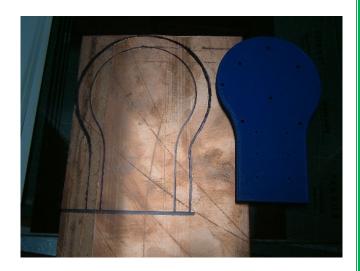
Backhead plate marked out onto 3mm copper sheet ready to be cut out next to its 3D printed former.
